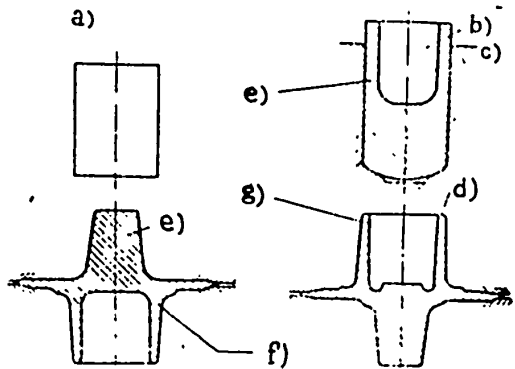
Method of Using a Crank-Press for Combining Pressing-In with a Burr-Producing Stamping
